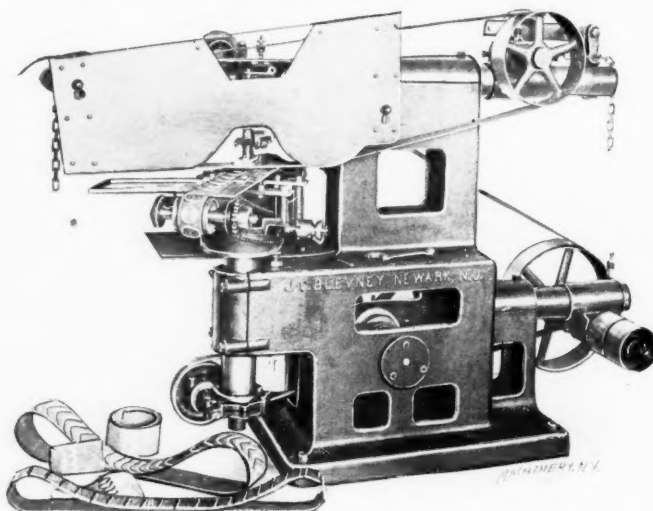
Blevney Horizontal Grinding and Polishing Machine, with Automatic Belt Feed
